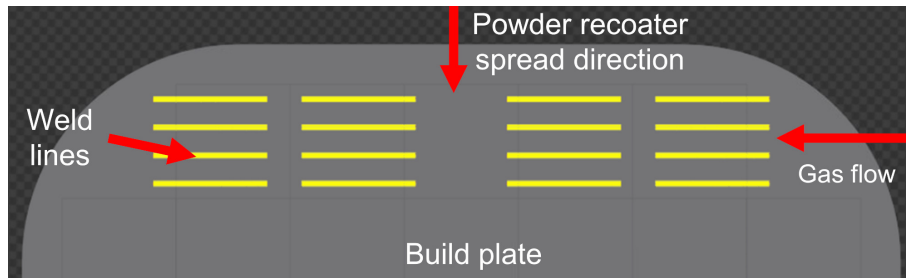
Layout of the 16 sets of weld lines on the build plate of Renishaw AM 400. Each set involves 5 weld lines where each weld lines is separated by a hatching distance of 100 μm.
